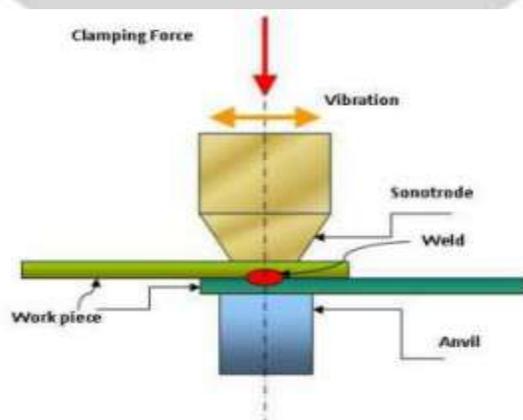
Schematic representation of ultrasonic metal welding
